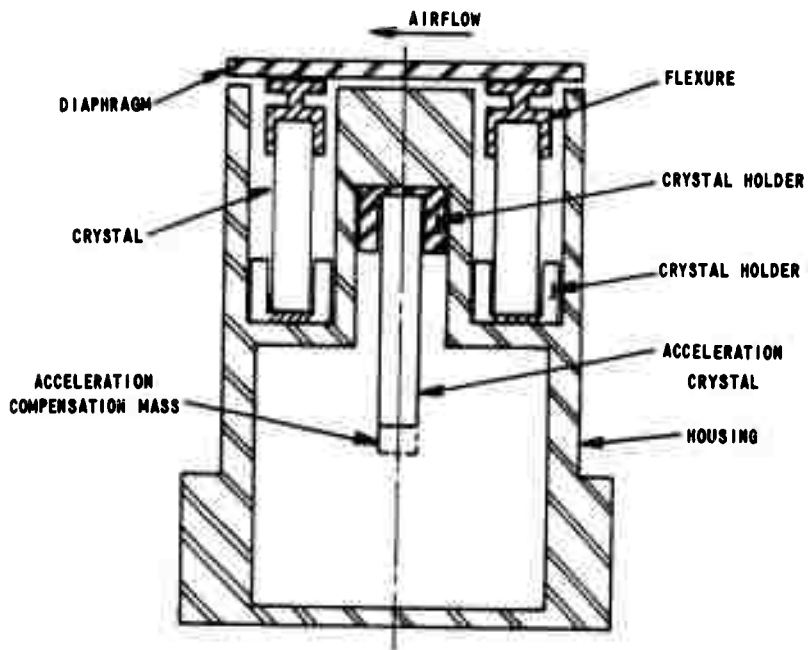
DRAWING OF SKIN FRICTION GAGE 25-38 AC
